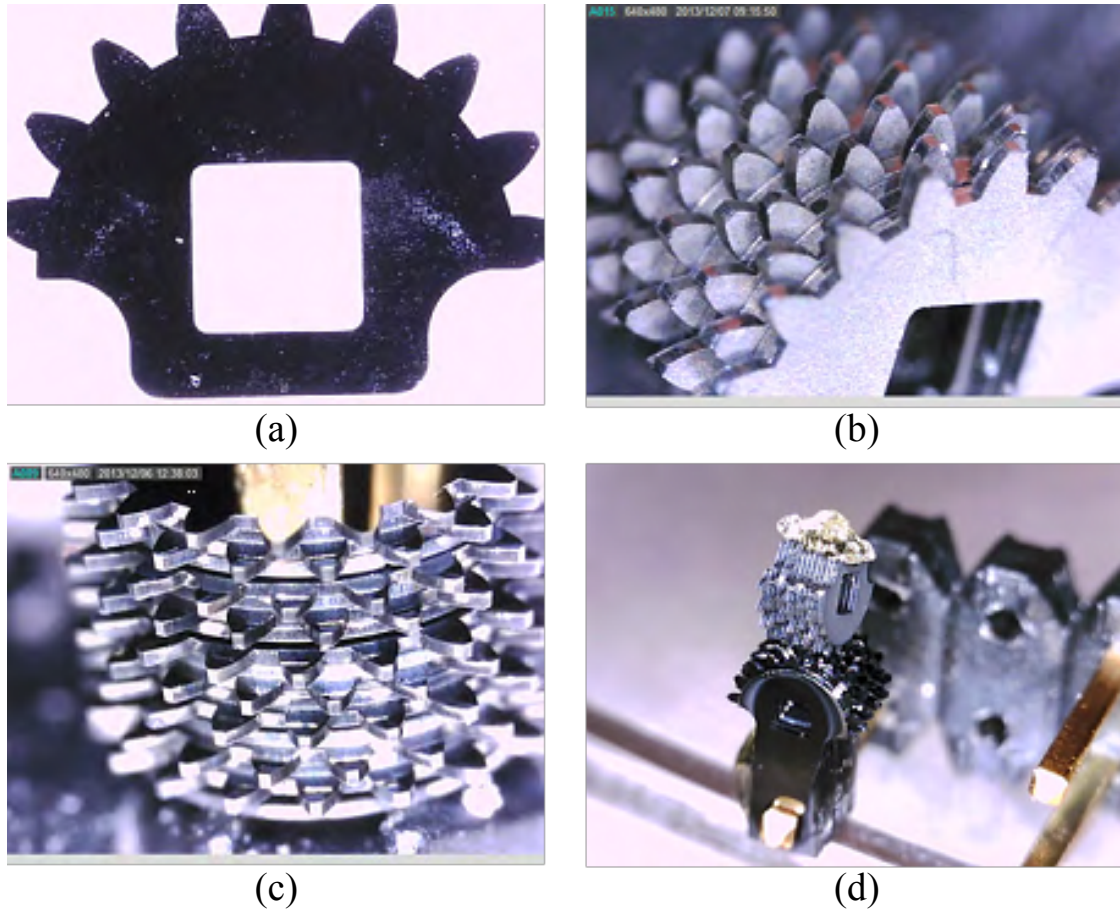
Micrographs of a millimeter-scale crossed-cylinder wrist mechanism fabricated by stacking carbon nanotube composite sheets. (a) A single layer, showing the gear teeth and alignment square for insertion of an electrical pin. (b) and (c) An assembled half cylinder. The reflections visible at the top of (c) are due to the smoothness of one side of the CNT sheet. (d) An assembled wrist mechanism, showing crossed cylinders mounted one on the other.
